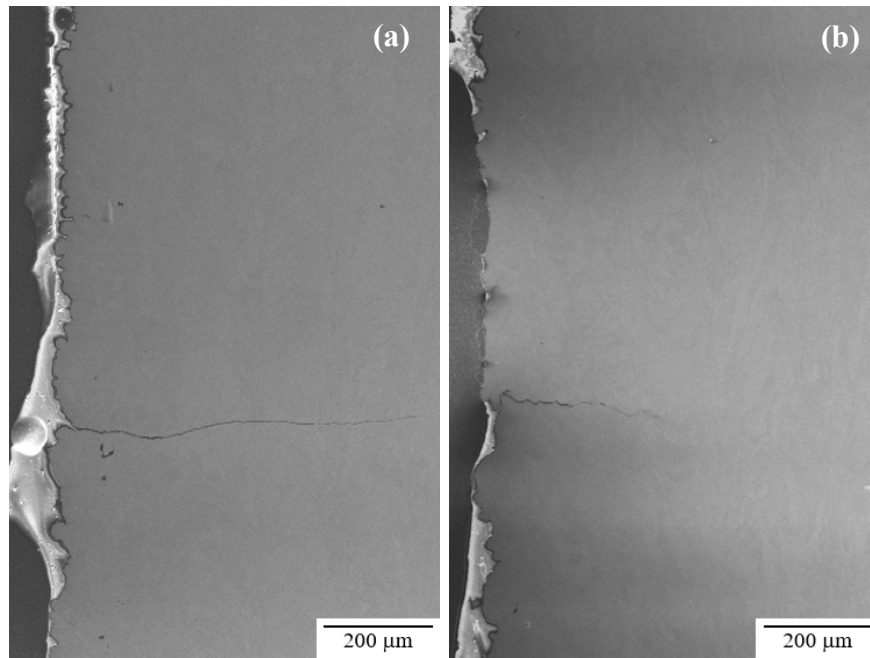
Example of crack initiating at surface crevice and propagating during UF testing in (a) 2.5 mm CL M2 and (b) 5.0 mm CL M2.
